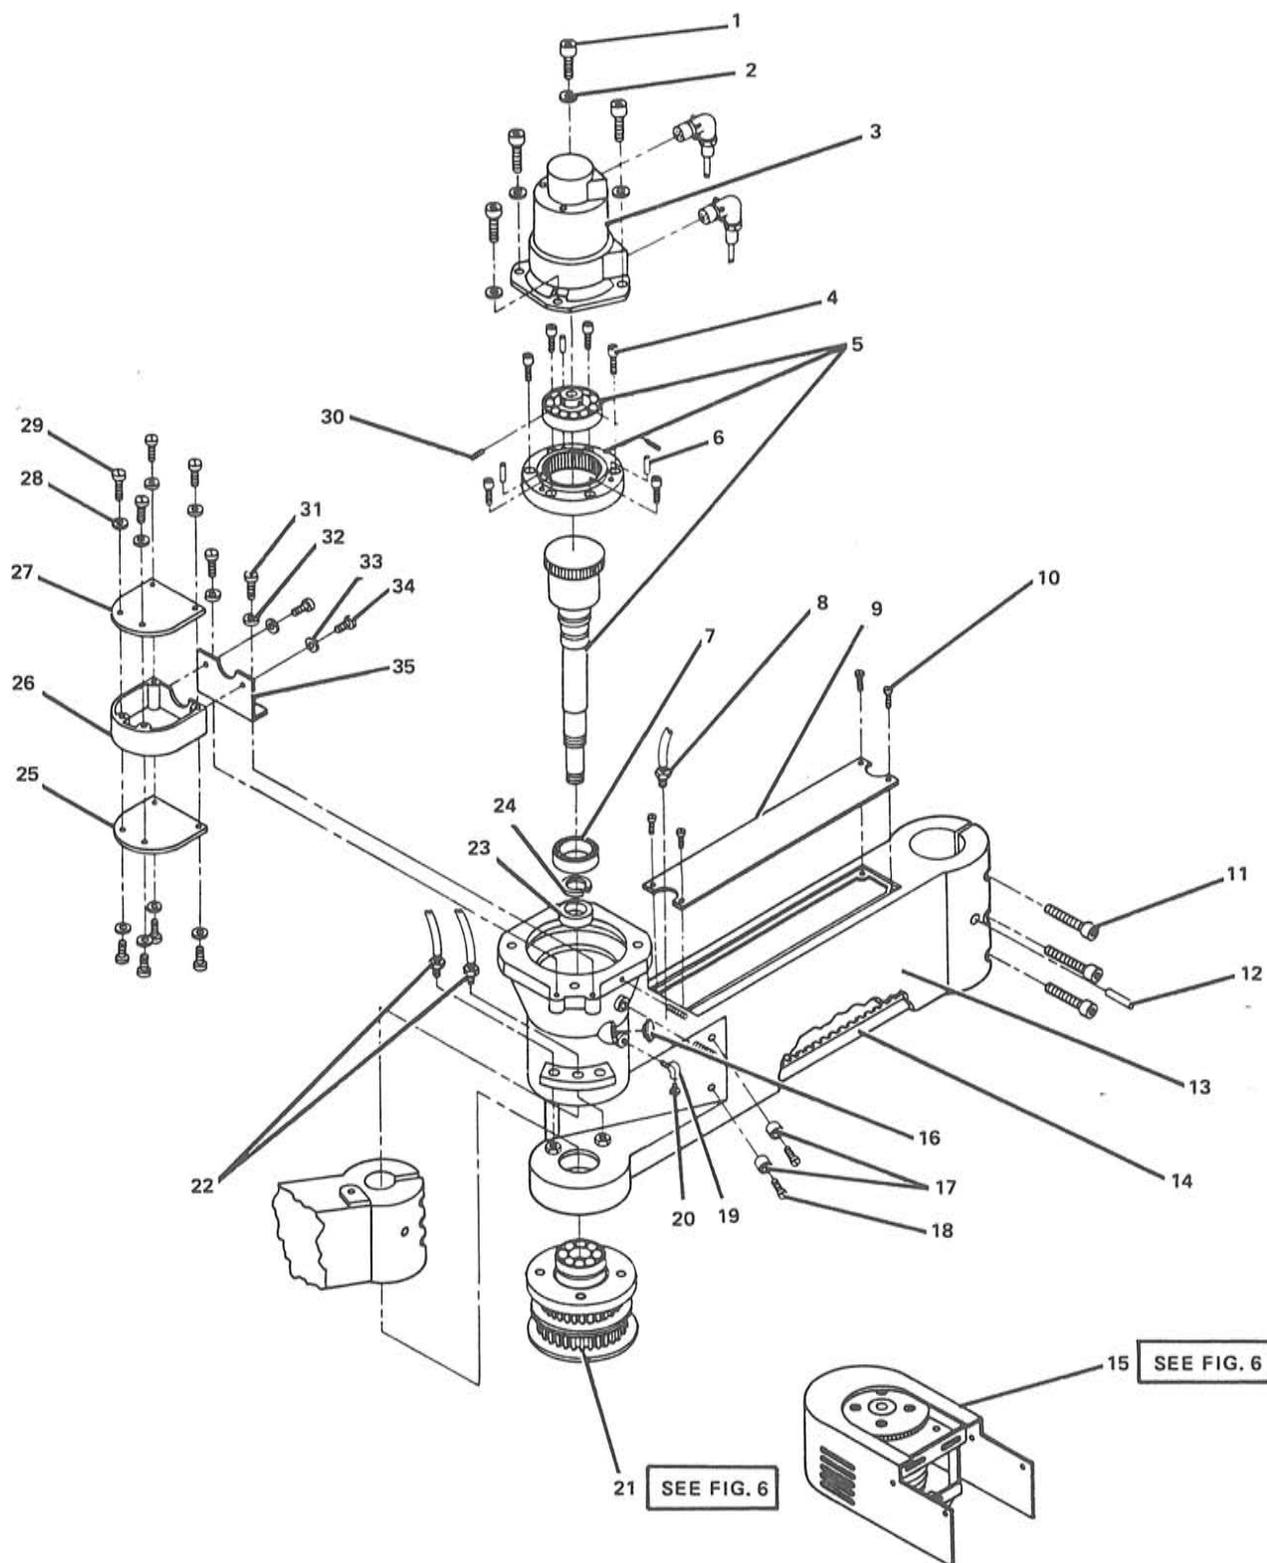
THETA TWO ASSEMBLY. SEE LIST 2.
